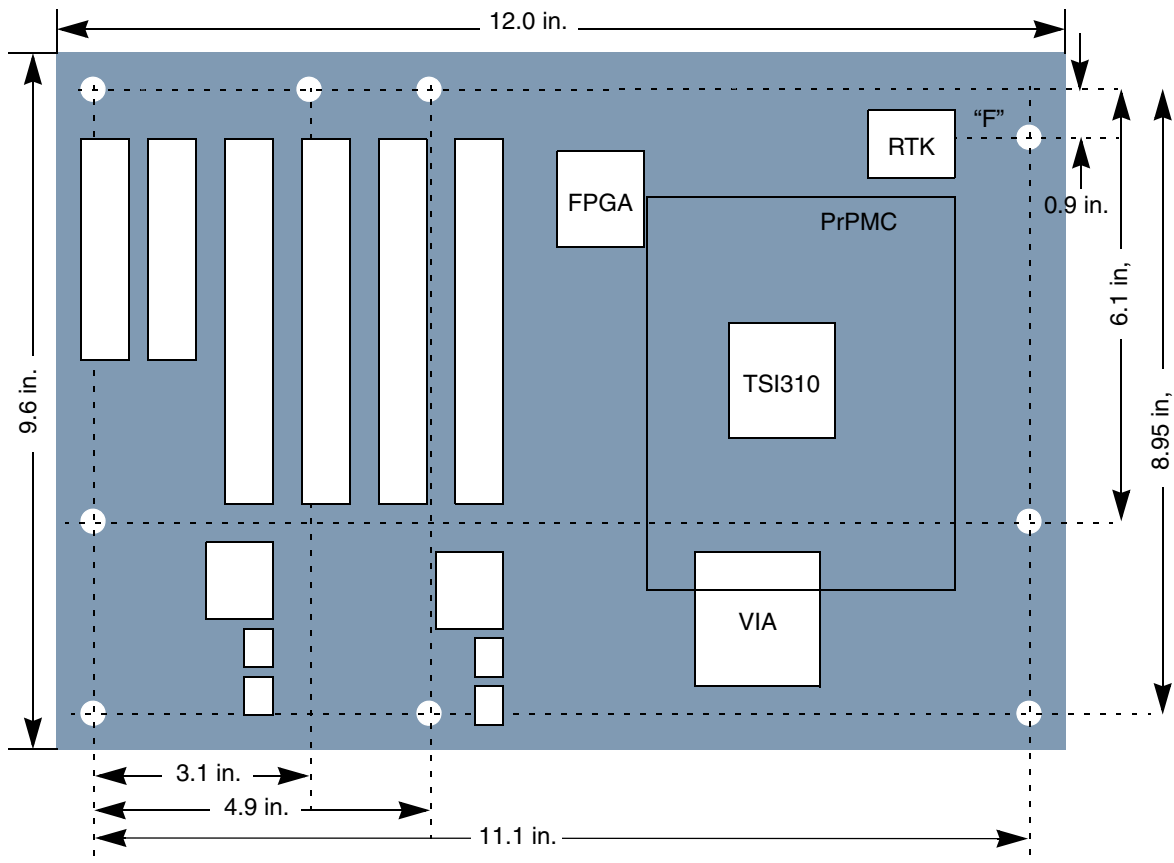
Arcadia ATX Chassis Mounting Holes
